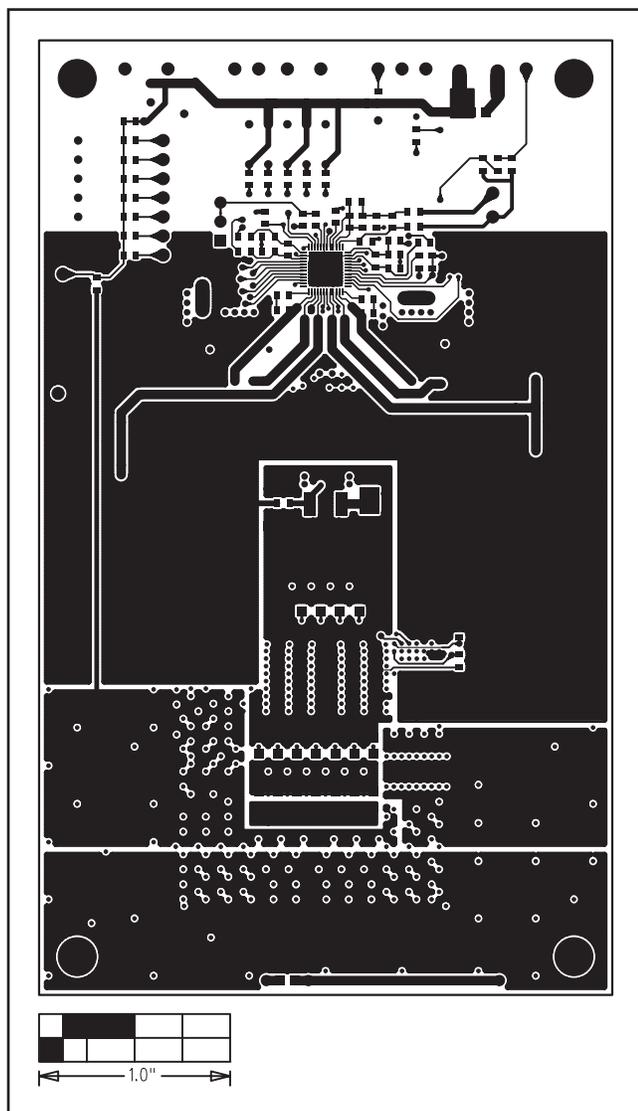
MAX17582 EV Kit PCB Layout—Solder Side
